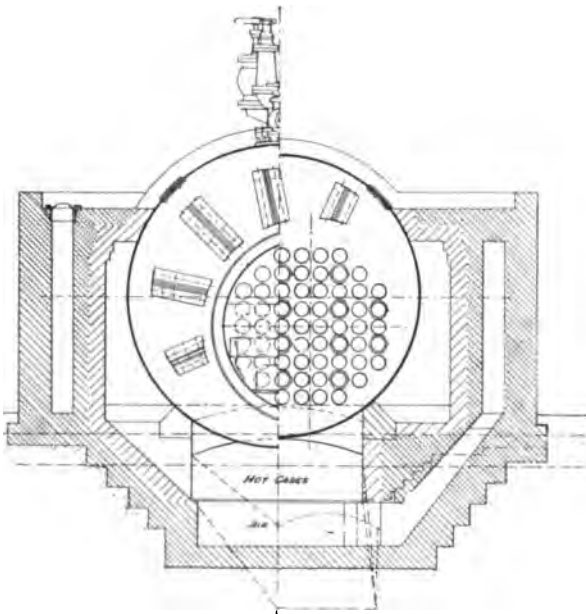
CORNISH TUBULAR BOILER—SECTION.
